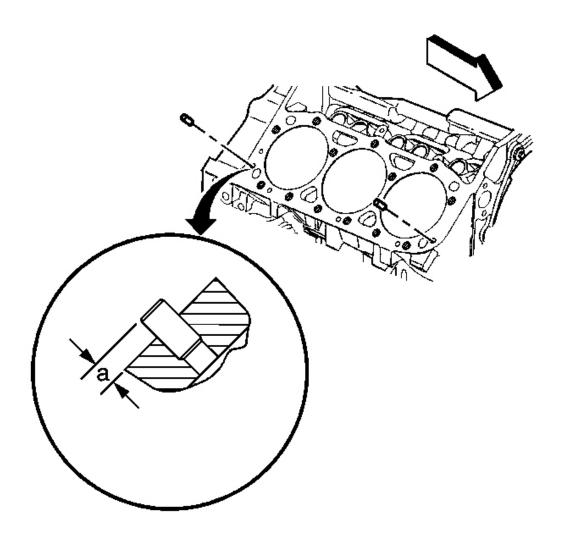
Right Side Cylinder Head Locator Dowel Pins Proper Installation Position Courtesy of GENERAL MOTORS CORP.
